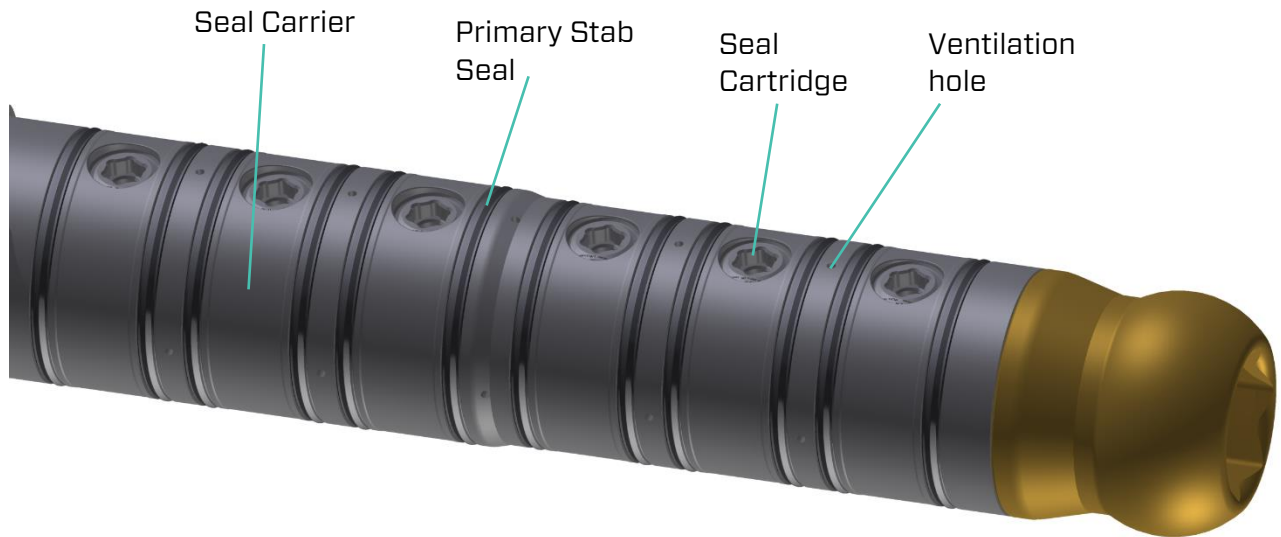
Seal Carrier and Seal Cartridges typical Valve Stab design
